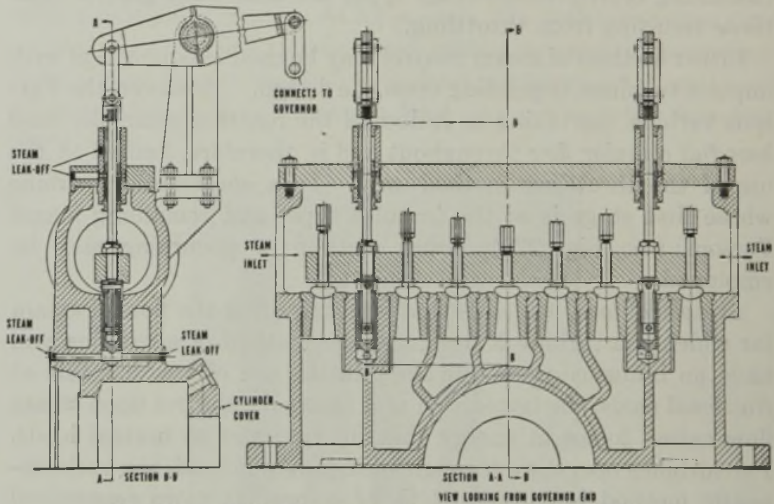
Multivalve steam chest, Westinghouse turbine.
